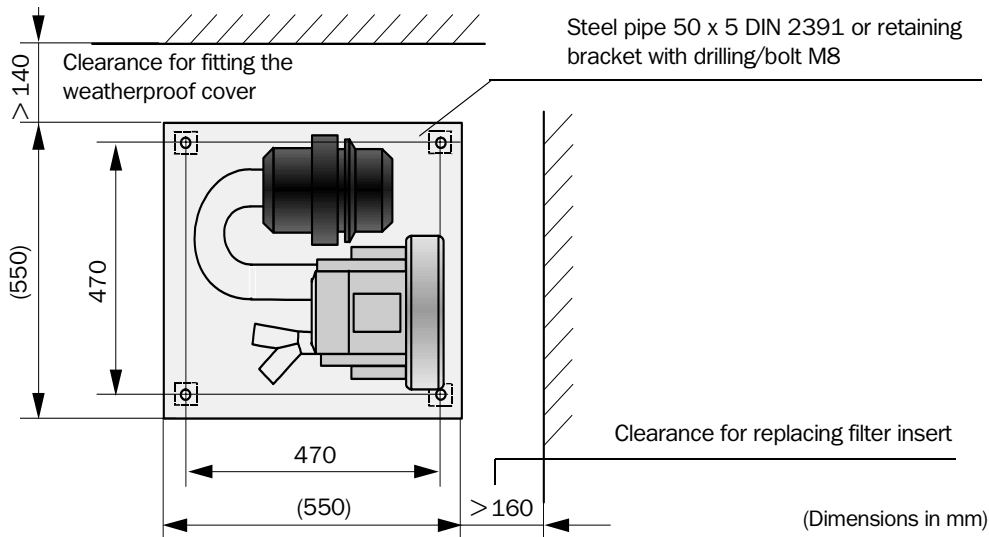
Mounting dimensions for purge-air unit with fan type 2BH1300
